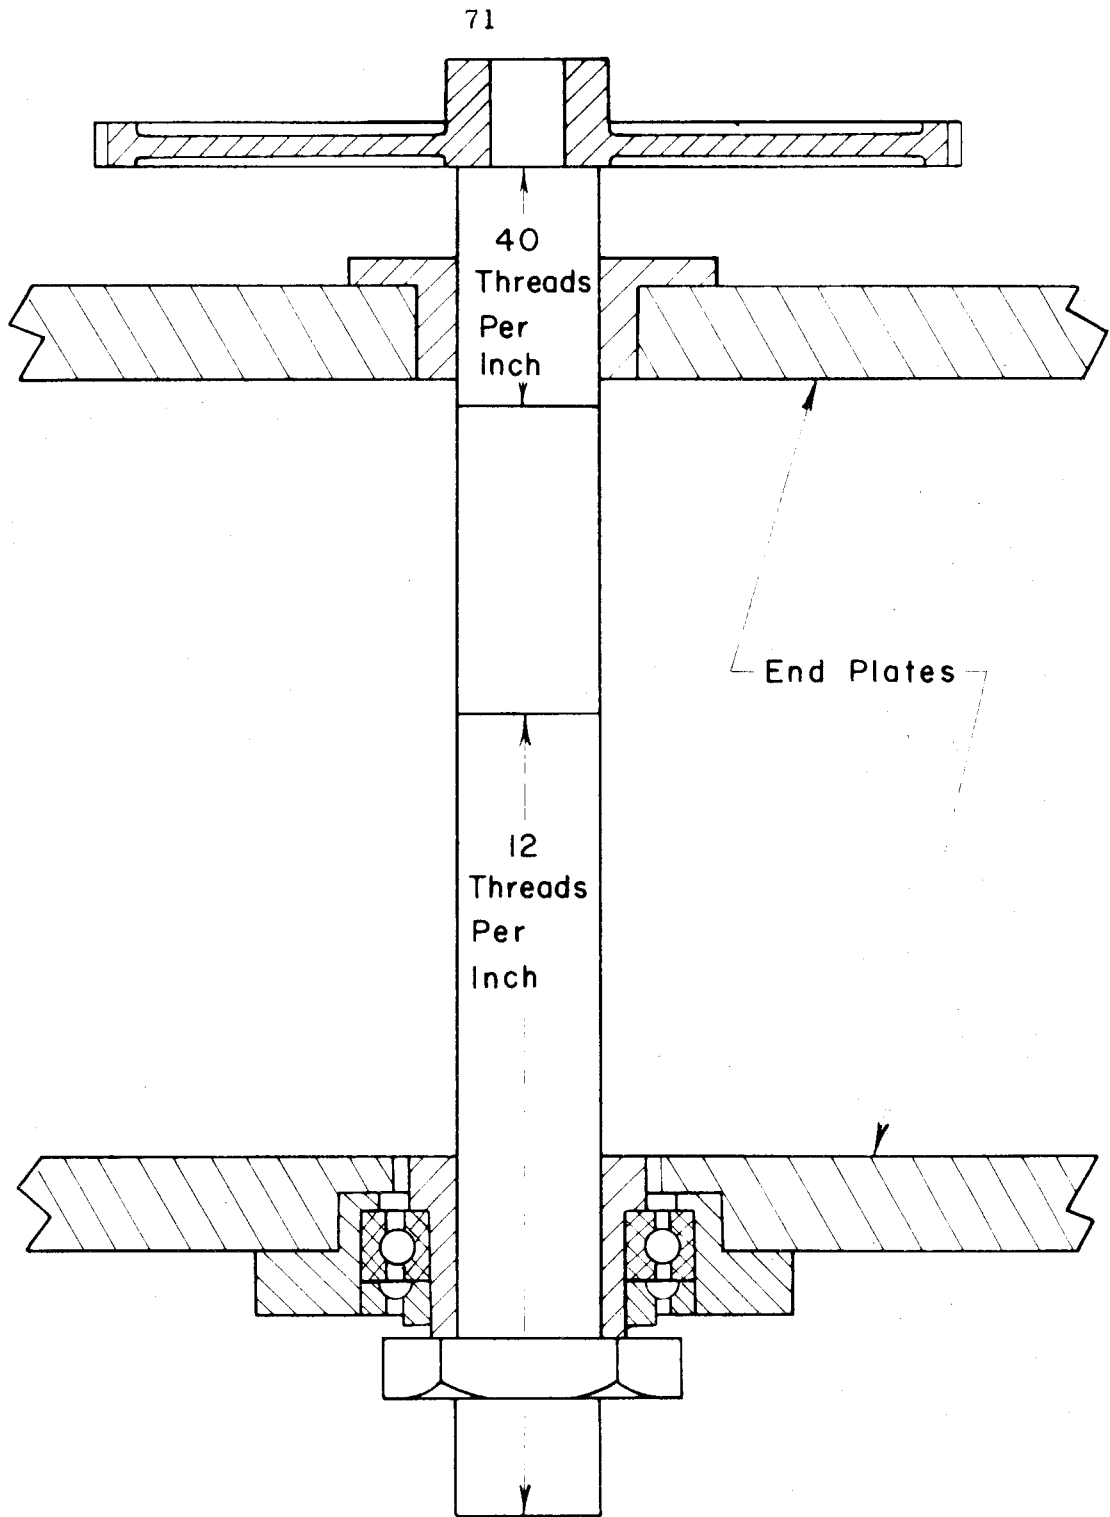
DETAILS OF TESTING MACHINE SCREW
